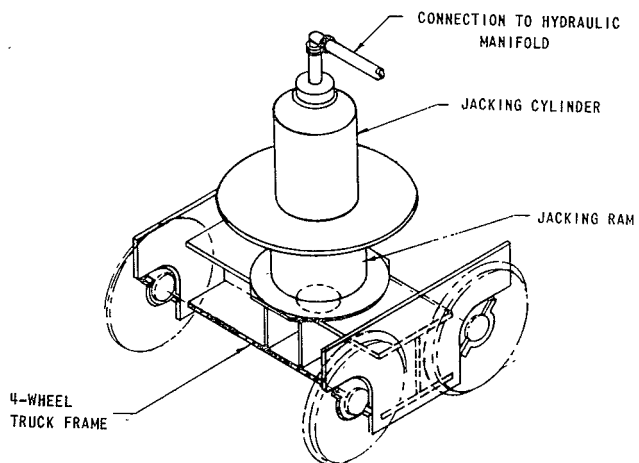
Typical Jacking Cylinder and Truck Frame Arrangement
